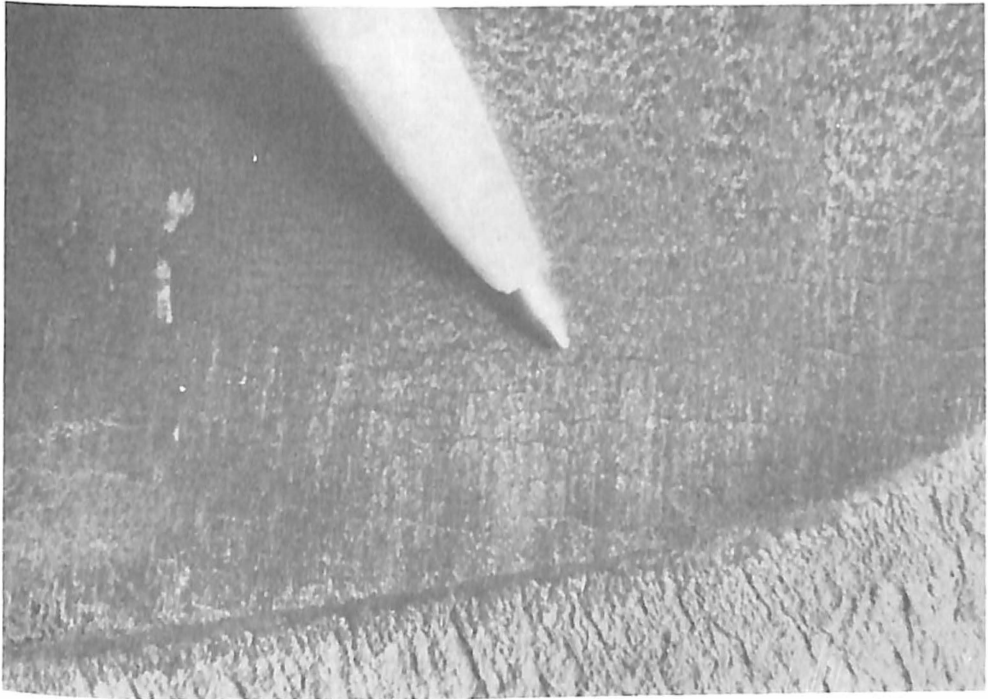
Coarse and uneven firecracks on the roll surface along the fracture surface
